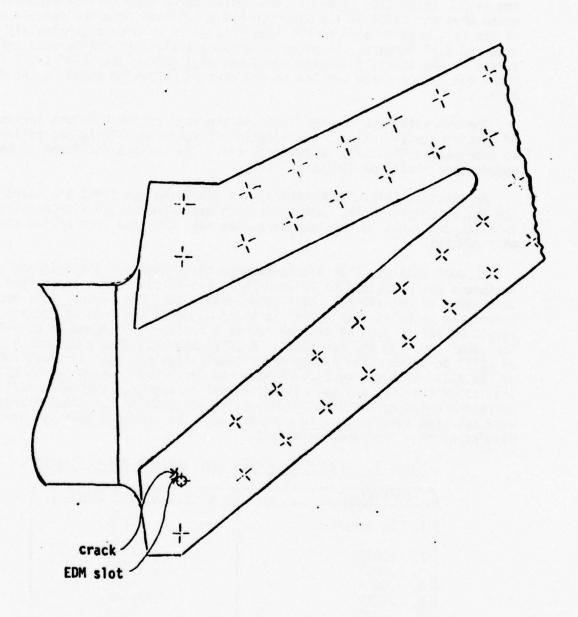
LOCATION OF HOLE IN LOWER FLANGE IN WHICH CRACK WAS INITIATED.
